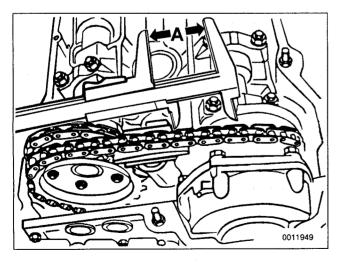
VANOS reference measurement (dimension A) between trigger plate (sender gear) and side of secondary chain tensioner.
